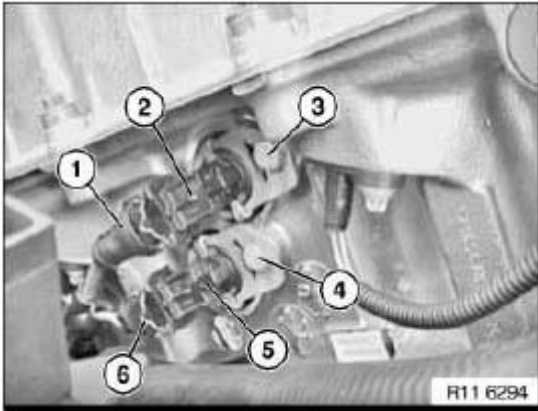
Identifying Inlet Solenoid Valve, Plug Connections, Exhaust Solenoid Valve, Screw And Bolt
